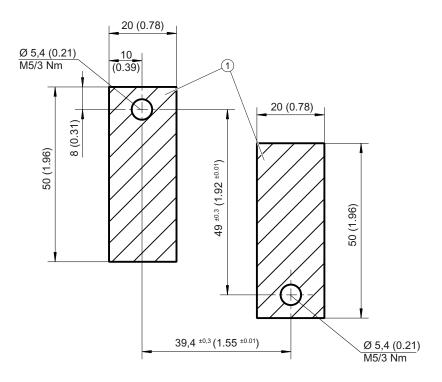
Dimension drawing of the DRIVE-CLiQ coupling, all dimensions in mm and (inches)
